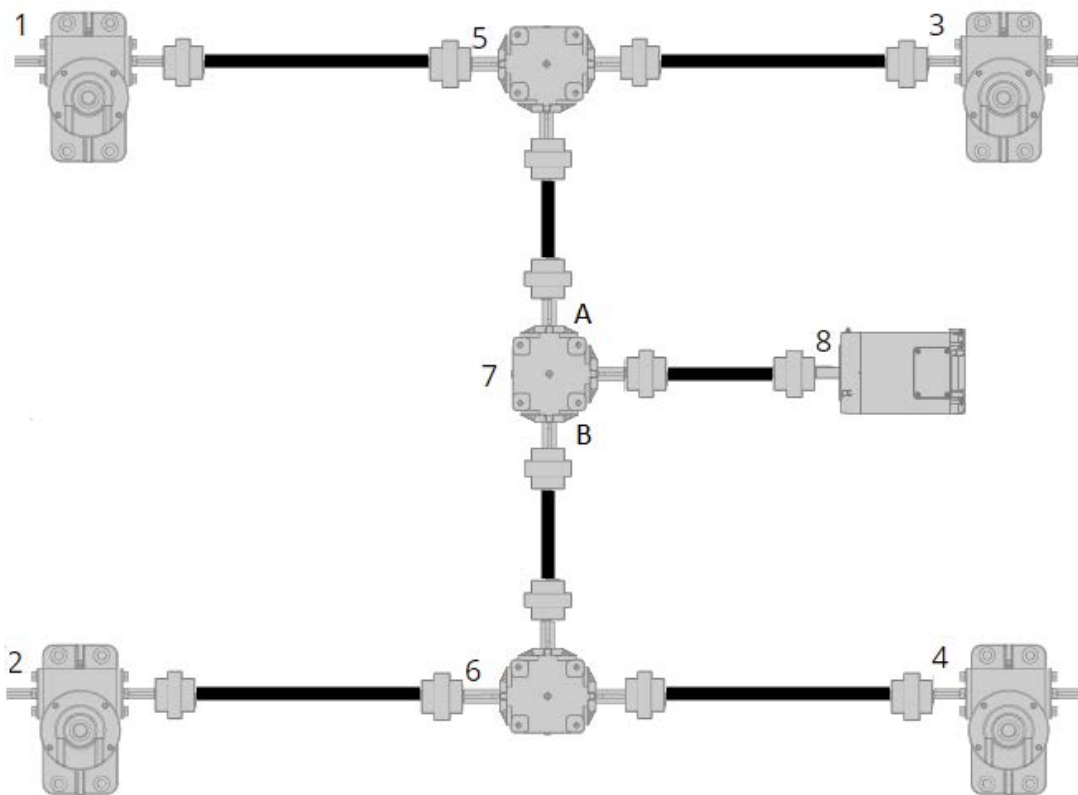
Jack Screw System with Mitre Gear Boxes and Motors
